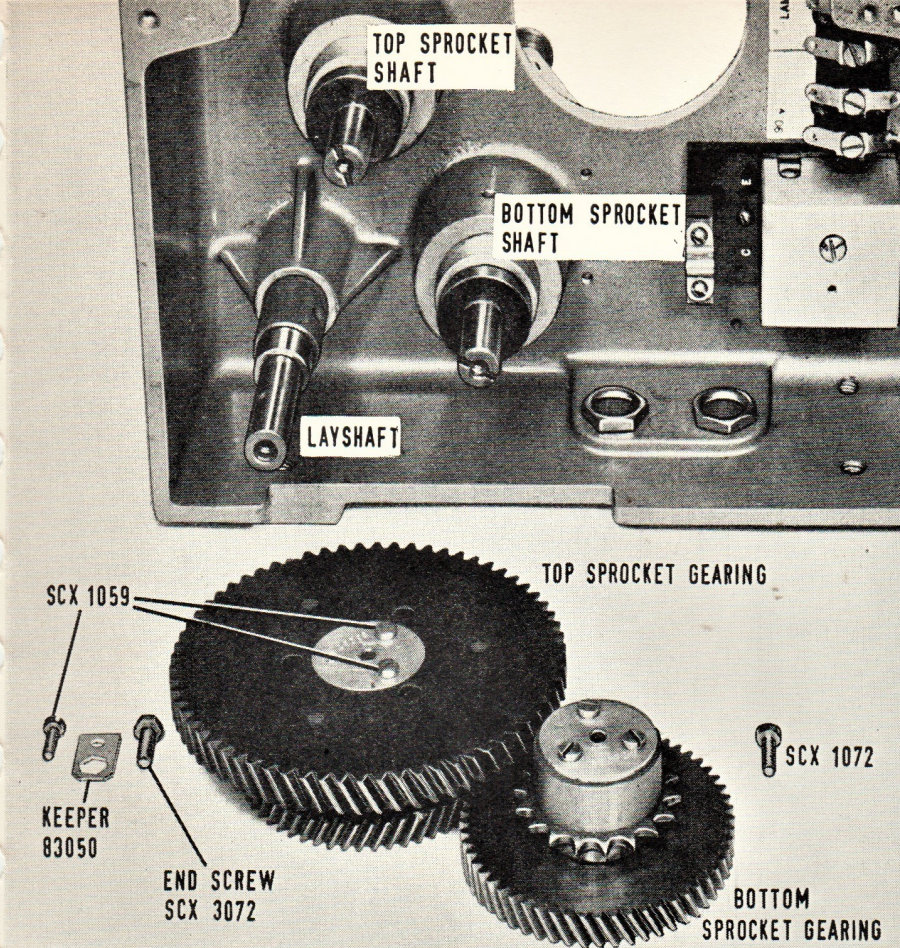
SPROCKET SHAFT GEARING REMOVED FROM SOUNDHEAD NON-OPERATING SIDE
